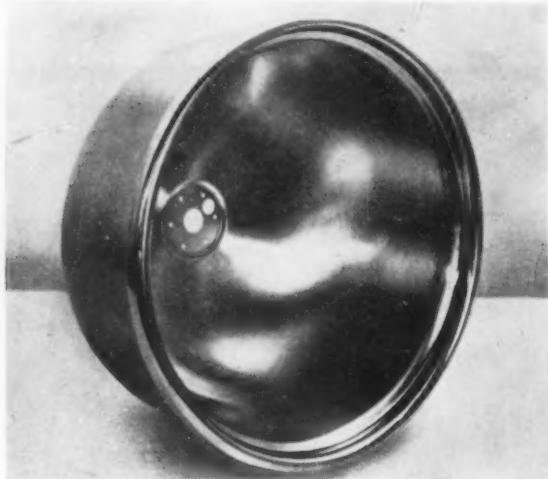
Washing machine tub deep-drawn from 430. Larger blank sizes are usually needed in deep-drawing 430 parts.
